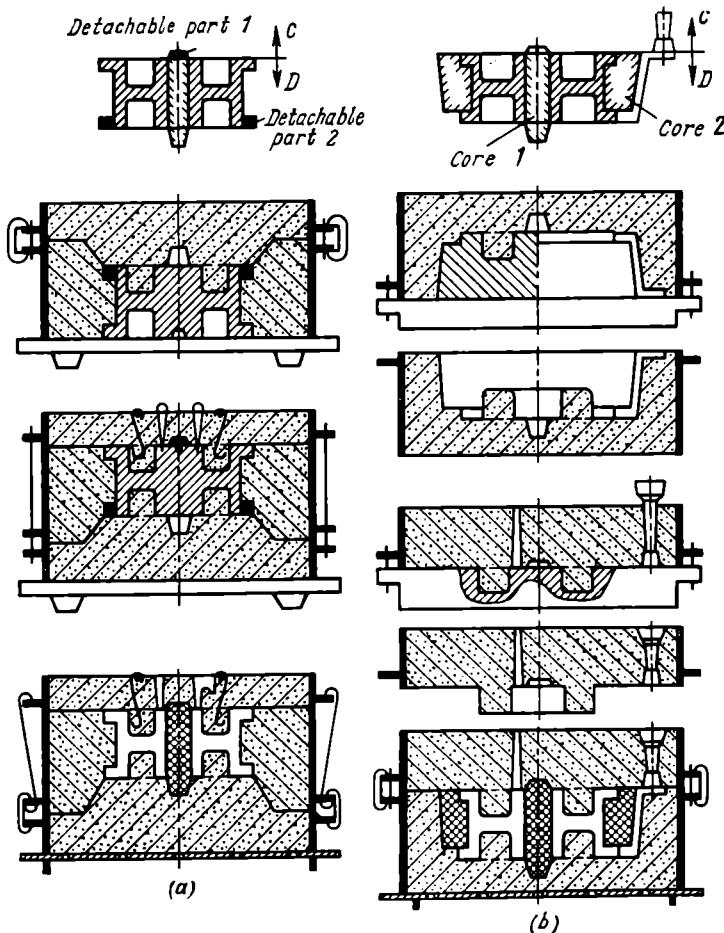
Schemes of hand (a) and machine (b) molding stages in the manufacture of a mold for casting a sheave
